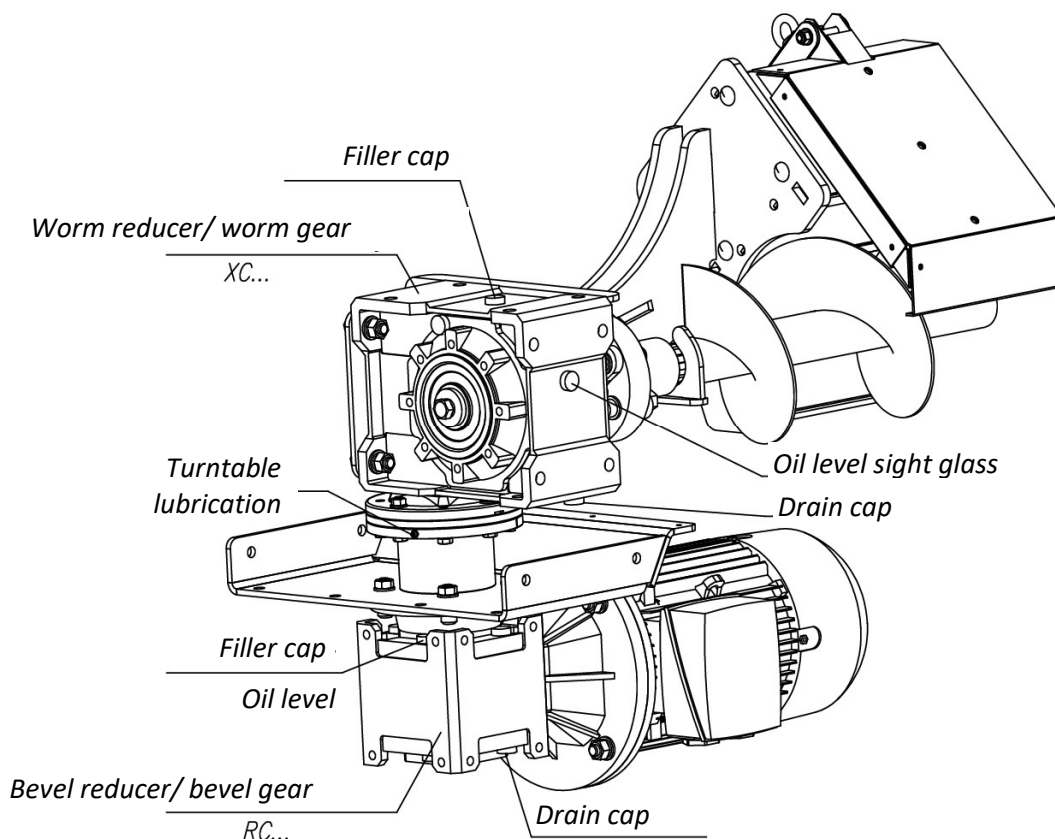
The conveyor bevel and worm gears (gearboxes) - points for inspecting, refilling and replacement of oil.
